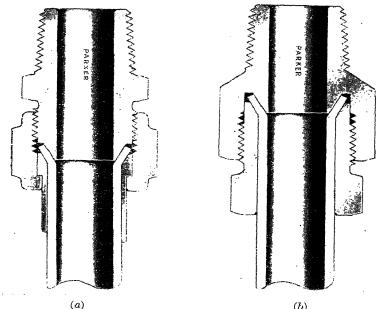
Two standard Parker tube fittings. (a) Triple tube coupling. (b) standard tube coupling. (Courtesy of Parker Appliance Co.)
